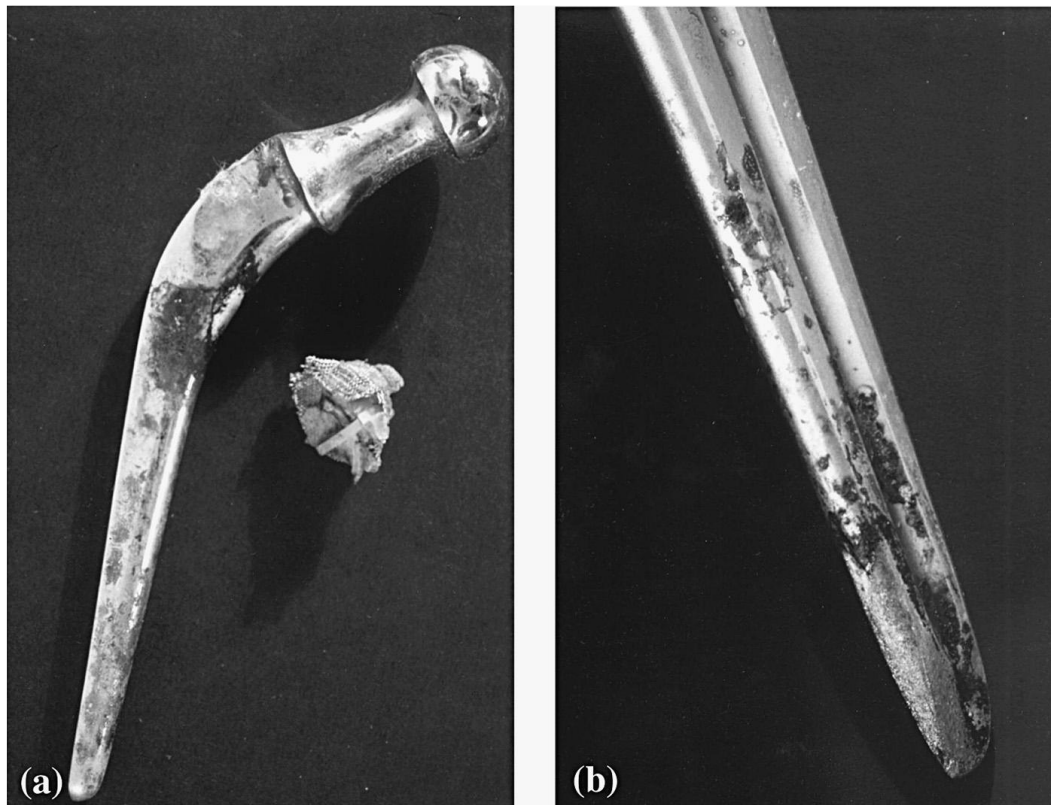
3 (a) Corrosion scale on a Charnley stainless steel stem, and (b) pitting and corrosion of a Muller stainless steel stem after implant removal.
